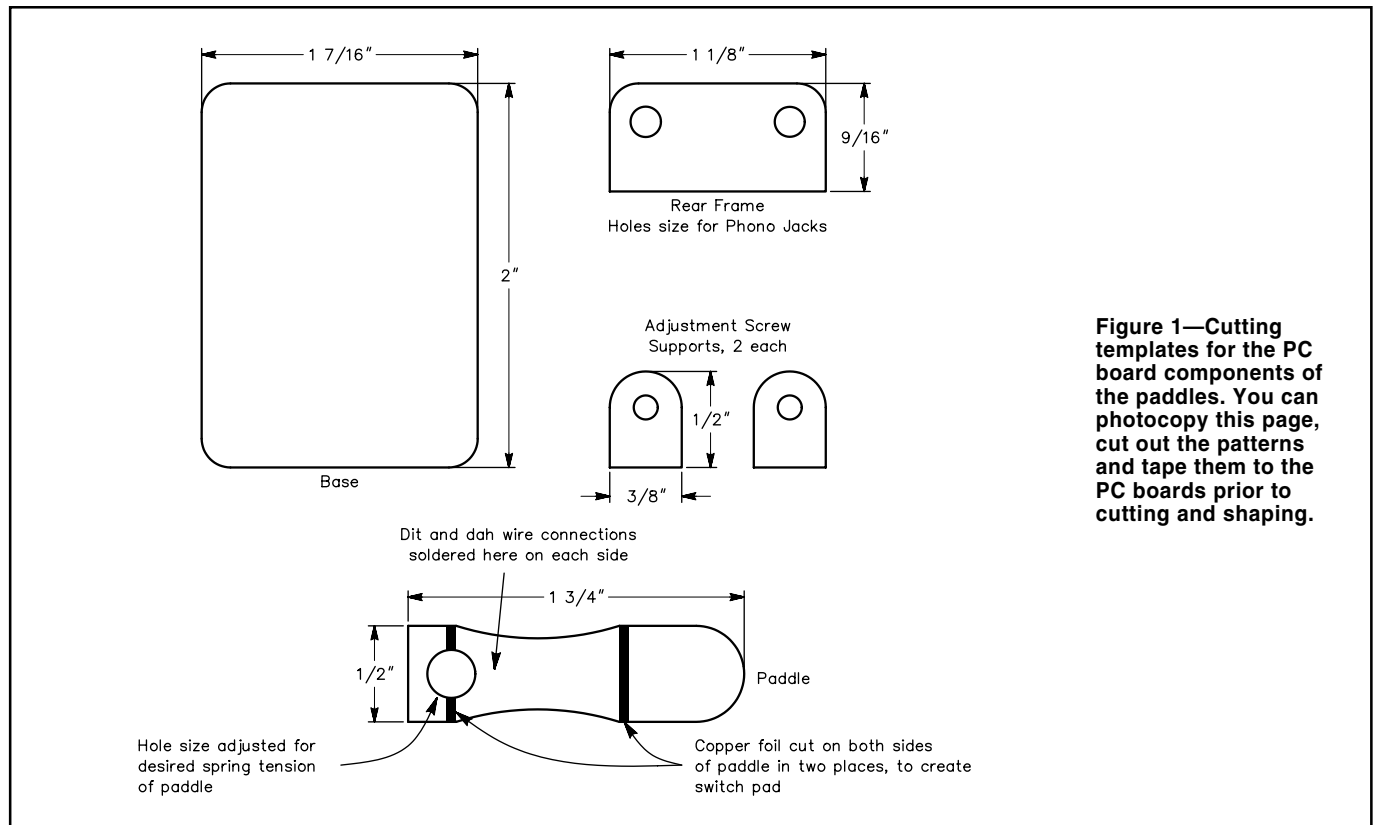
Cutting templates for the PC board components of the paddles. You can photocopy this page, cut out the patterns and tape them to the PC boards prior to cutting and shaping.
